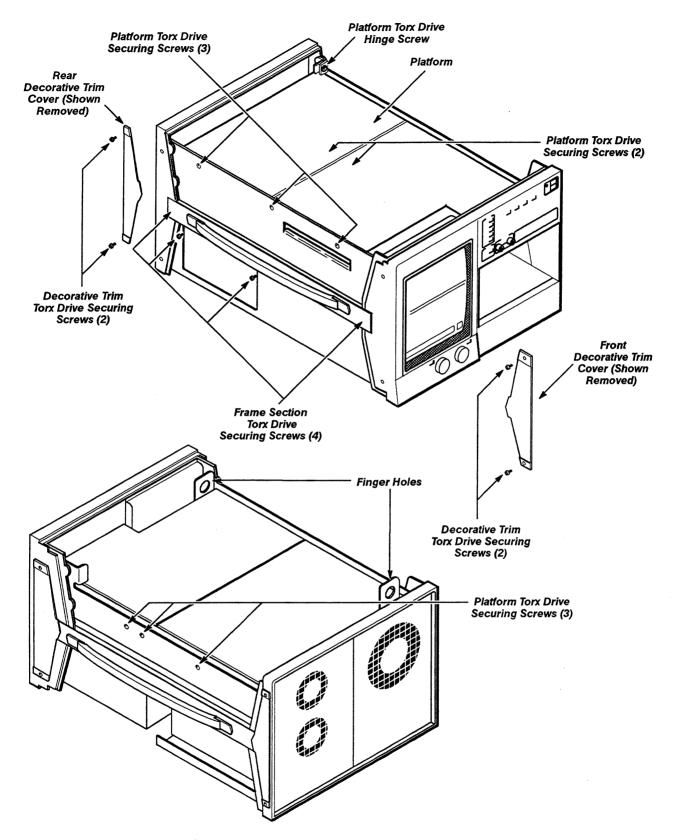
Removing/Replacing the Left Side Frame Section and Raising the Platform
